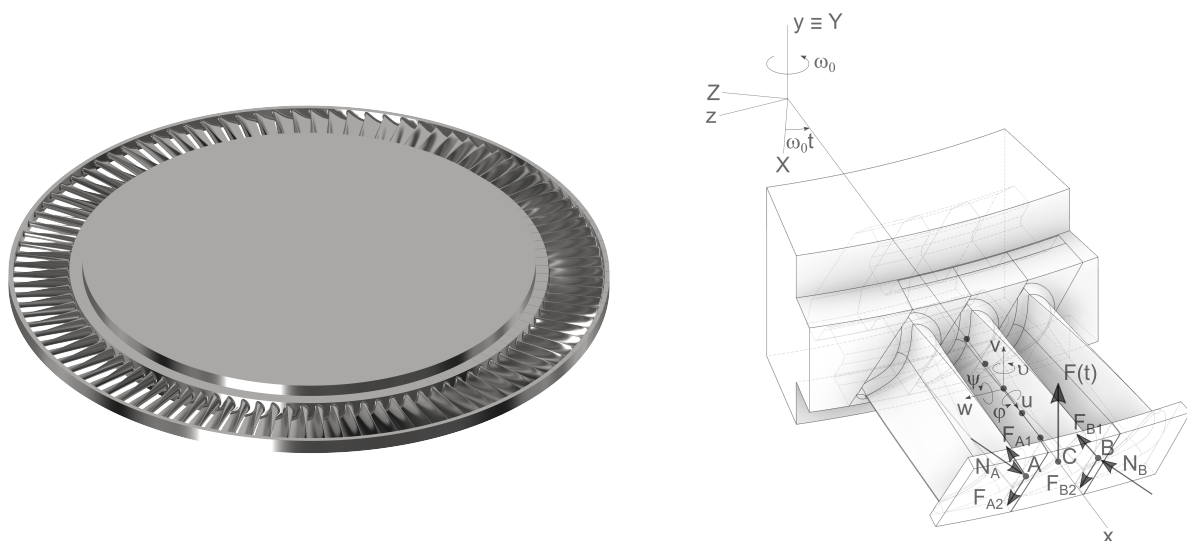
(Left) Bladed turbine disk consisting of one hundred MTD30-HP15 blades; (right) drawing of a segment of the disk with contact forces
